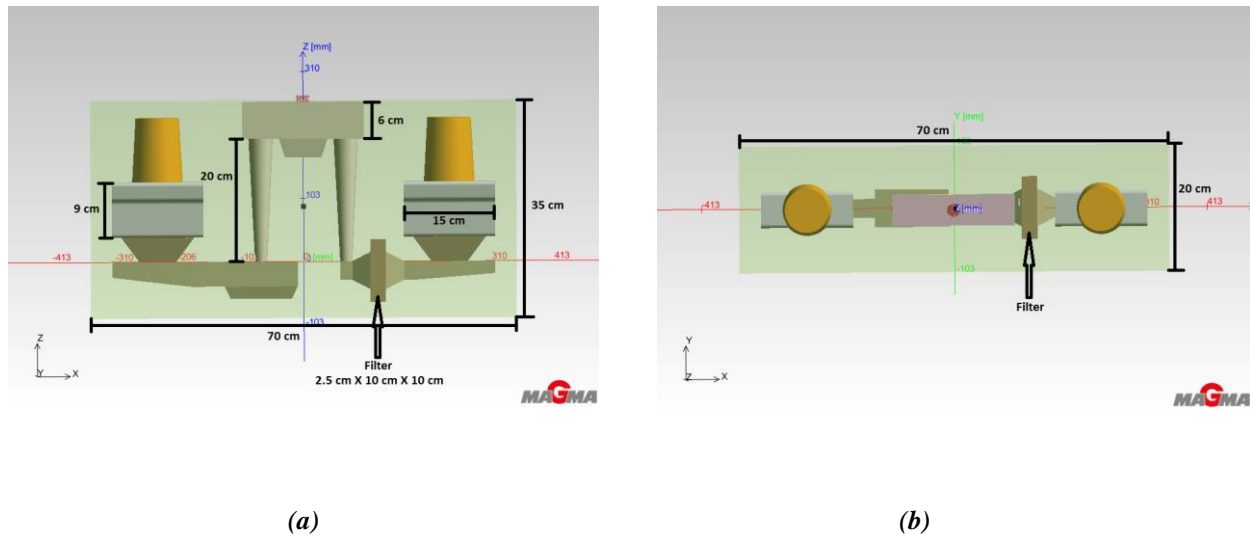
MAGMA 5.3 drawing of mold and rigging system: (a) front view and (b) top view
